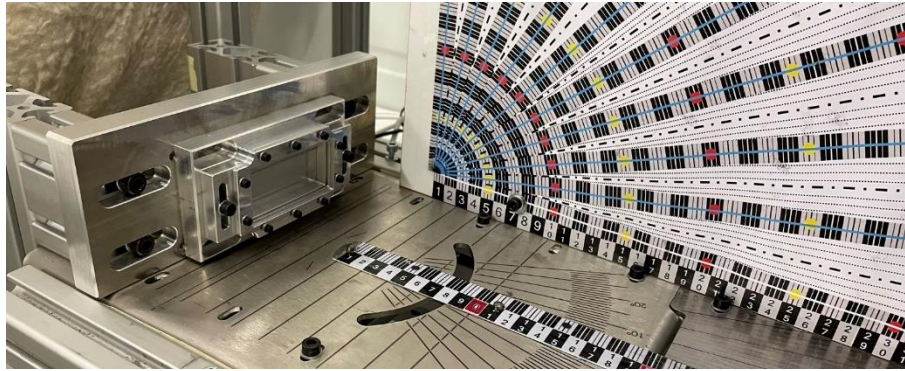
Close-up photo of the impact fixture installed in the ball cannon setup
